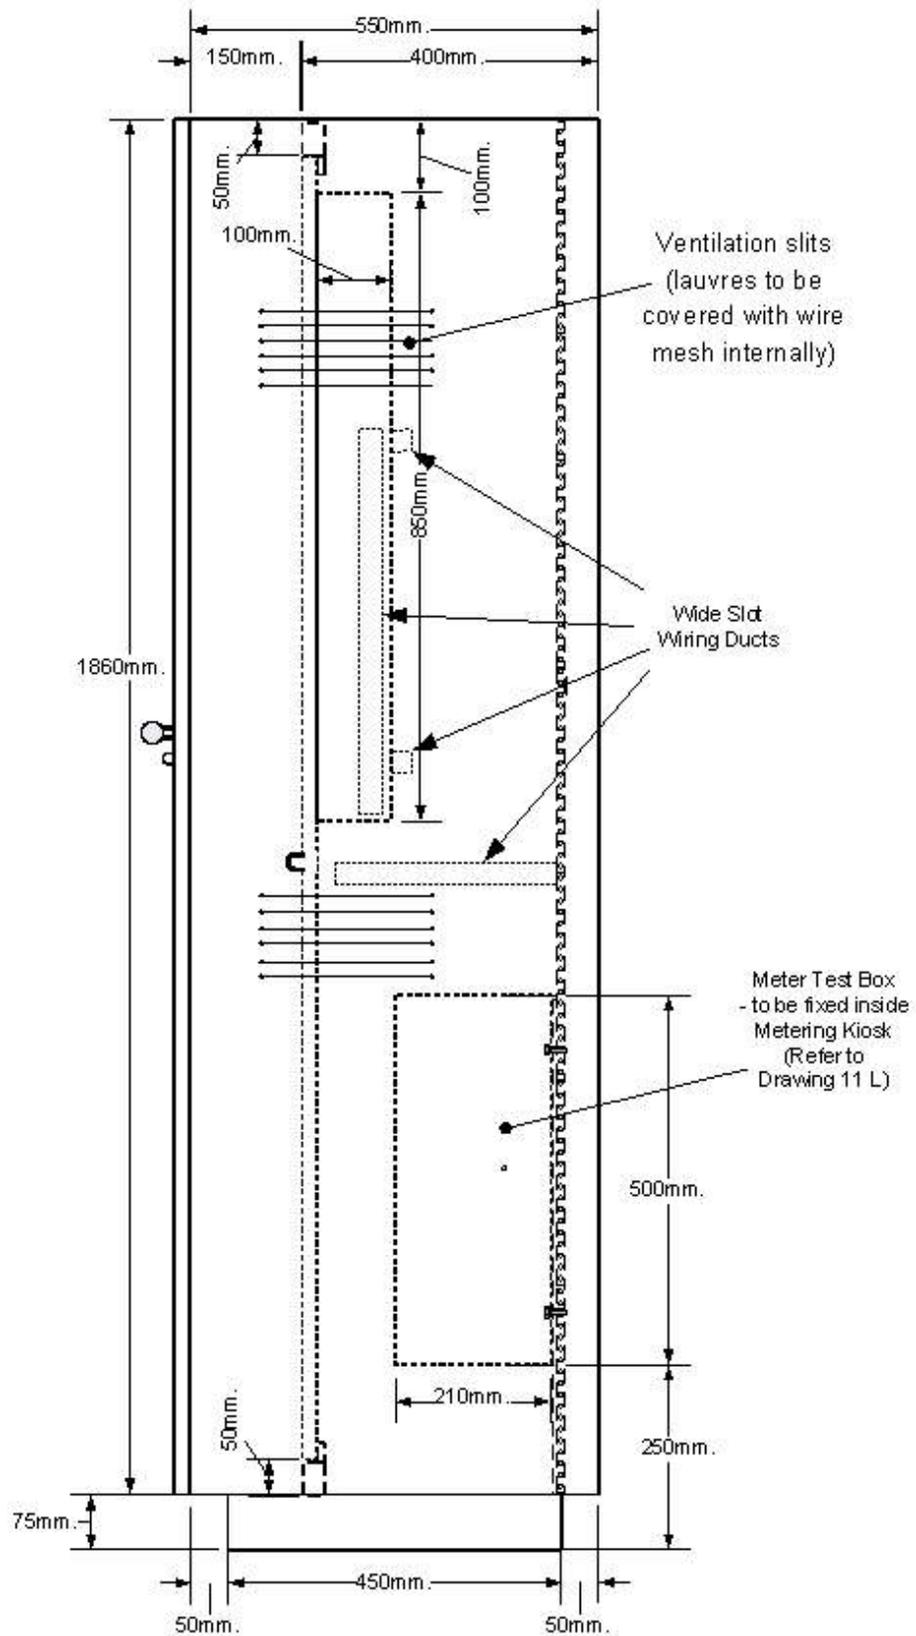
H : MVHV,3 FEEDER METERING KIOSK : Internal Door – Perspective & Side View
